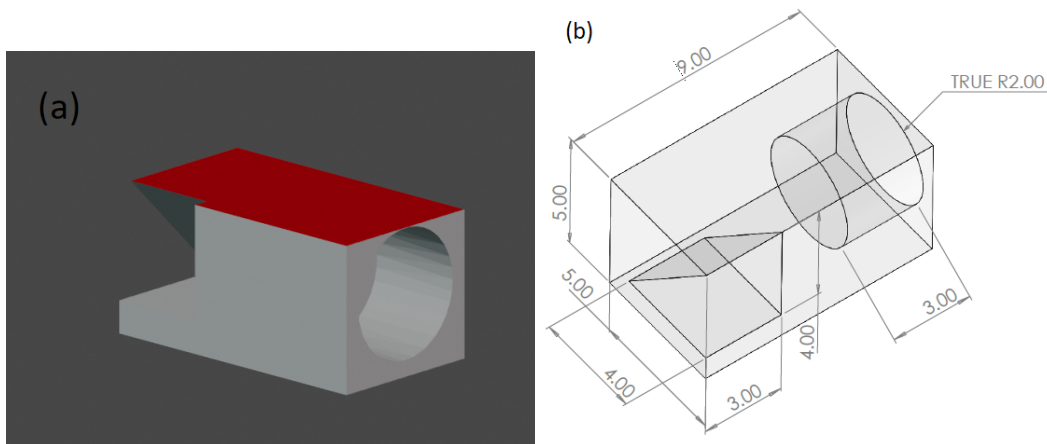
(a) The layer 226 (the red cross section) is the layer at the upper end of the cylindrical cutout. (b) The part drawing.
